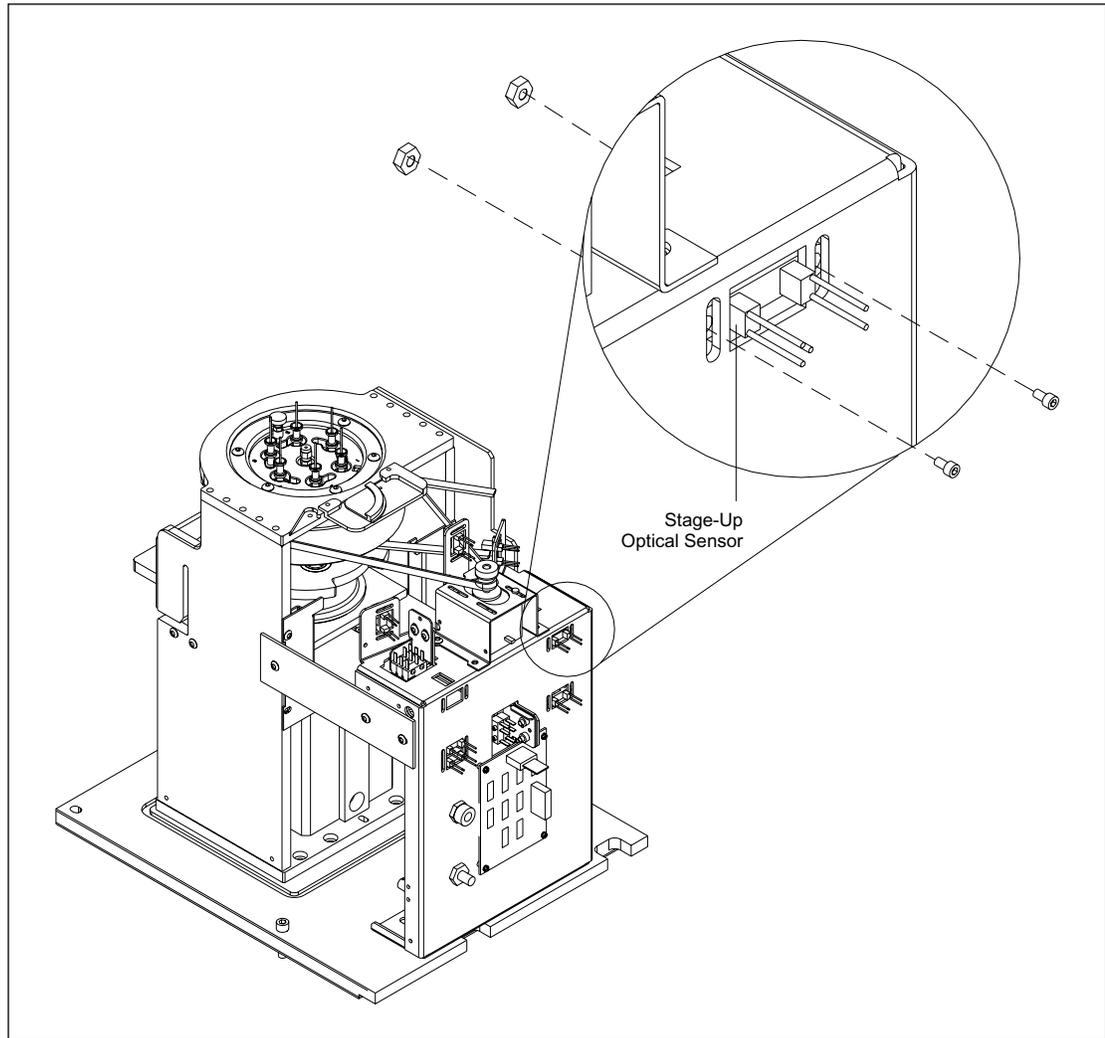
Anode Stage-Up Optical Sensor Mounting.
